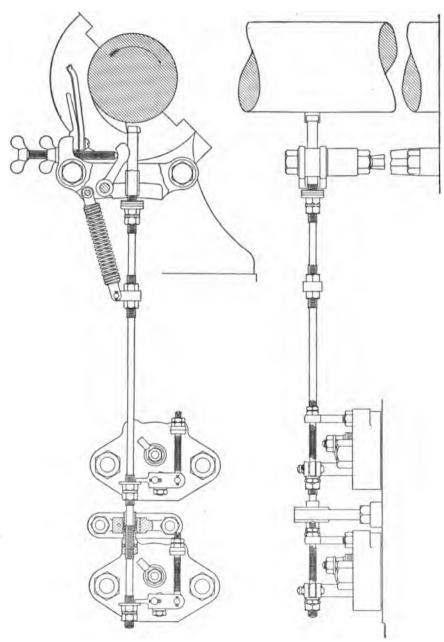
Make-and-break Ignition Device. Snow Gas-engine.
